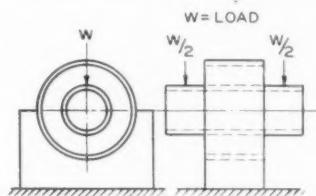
LOADING OF RUBBER BUSHING 90 DEG TO AXIS OF BUSHING
